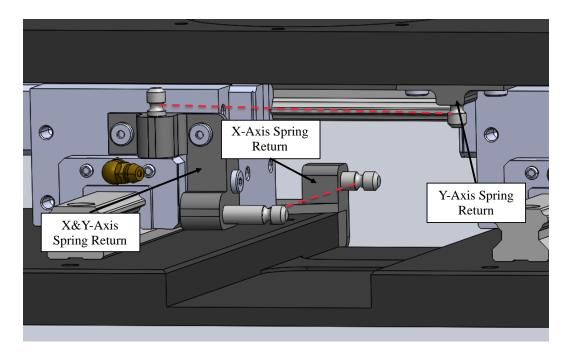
View from the front of the stage looking at the spring holding brackets. The cantilevered stage plate and actuation systems are hidden to allow for a clearer view. After CDR we split the X&Y spring return bracket (shown above) into two separate parts. Functionally it is the same.
